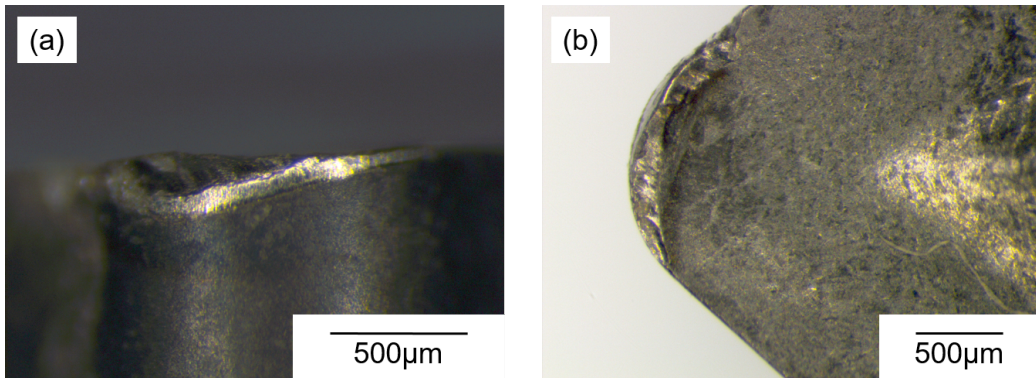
Microscope images showing the degree of tool wear after trial 1.2.3 on billet 3.2. Showing (a) the flank face and (b) the rake face.
